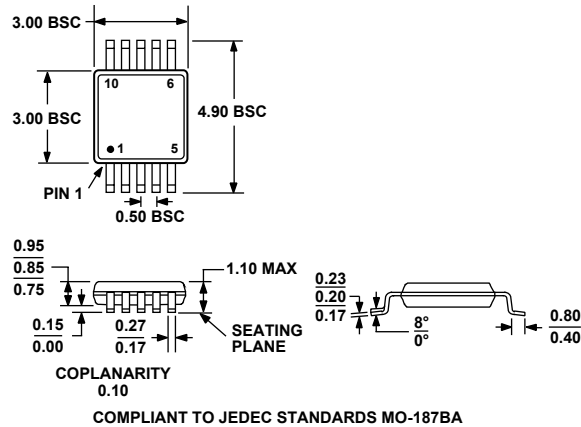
10-Lead Mini Small Outline Package [MSOP] (RM-10)
